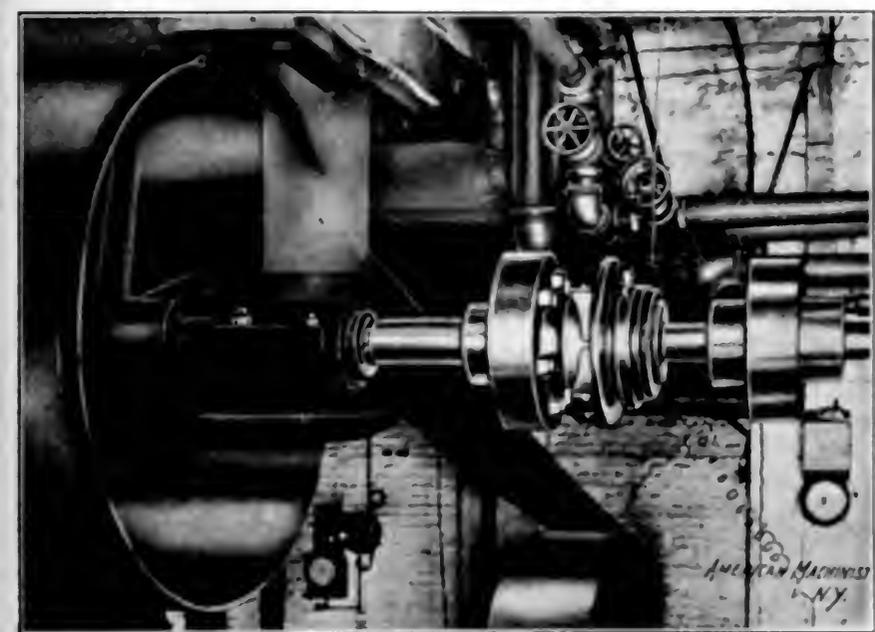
DYNAMOMETER IN A LINE SHAFT IN A MACHINE SHOP—SHAFT 3 INCHES IN DIAMETER.
